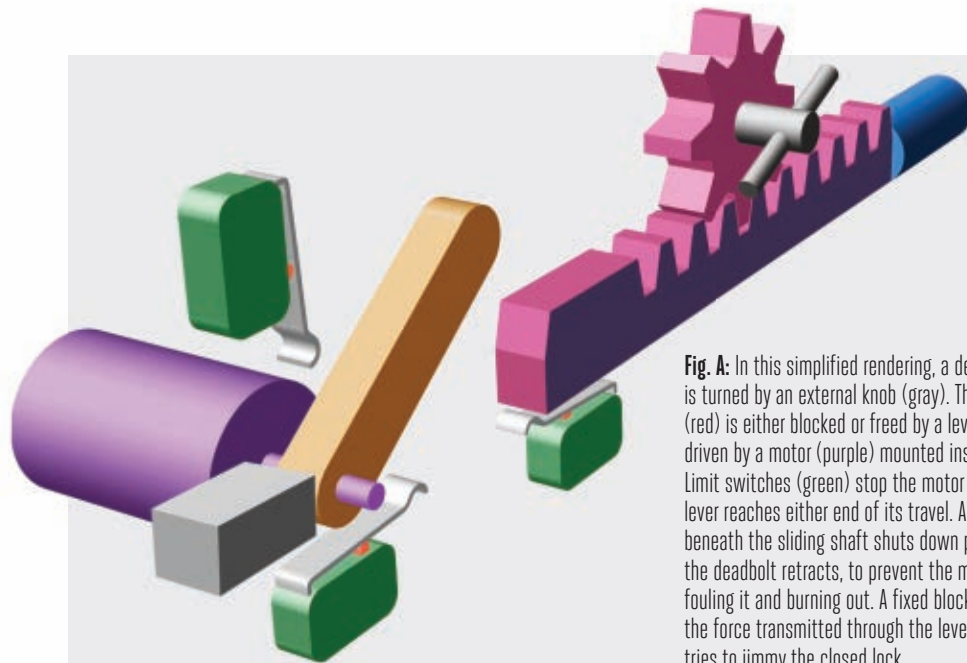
Fig. A: In this simplified rendering, a deadbolt (blue) is turned by an external knob (gray). The sliding shaft (red) is either blocked or freed by a lever (yellow) driven by a motor (purple) mounted inside the door. Limit switches (green) stop the motor when the lever reaches either end of its travel. A third switch beneath the sliding shaft shuts down power when the deadbolt retracts, to prevent the motor from fouling it and burning out. A fixed block (gray) resists the force transmitted through the lever if someone tries to jimmy the closed lock.
